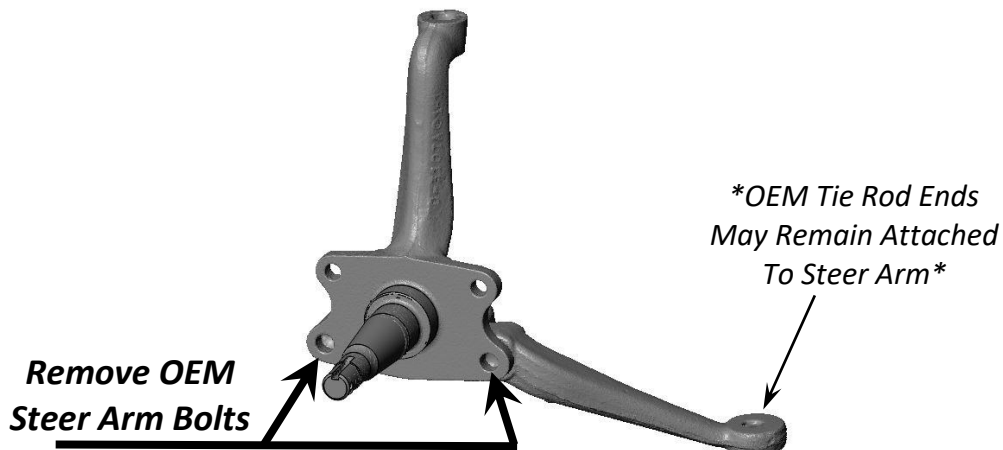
Spindle w/All Components Removed & Ready for Disc Brake Assembly (LH Side Shown)
